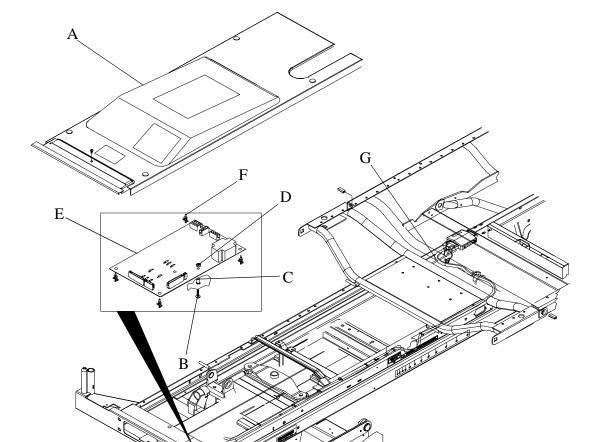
Control Board Assembly—P/N 45701 or 45701-01
